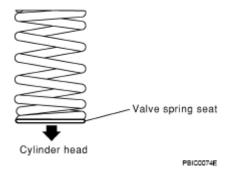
Identifying Valve Spring Courtesy of NISSAN MOTOR CO., U.S.A.
